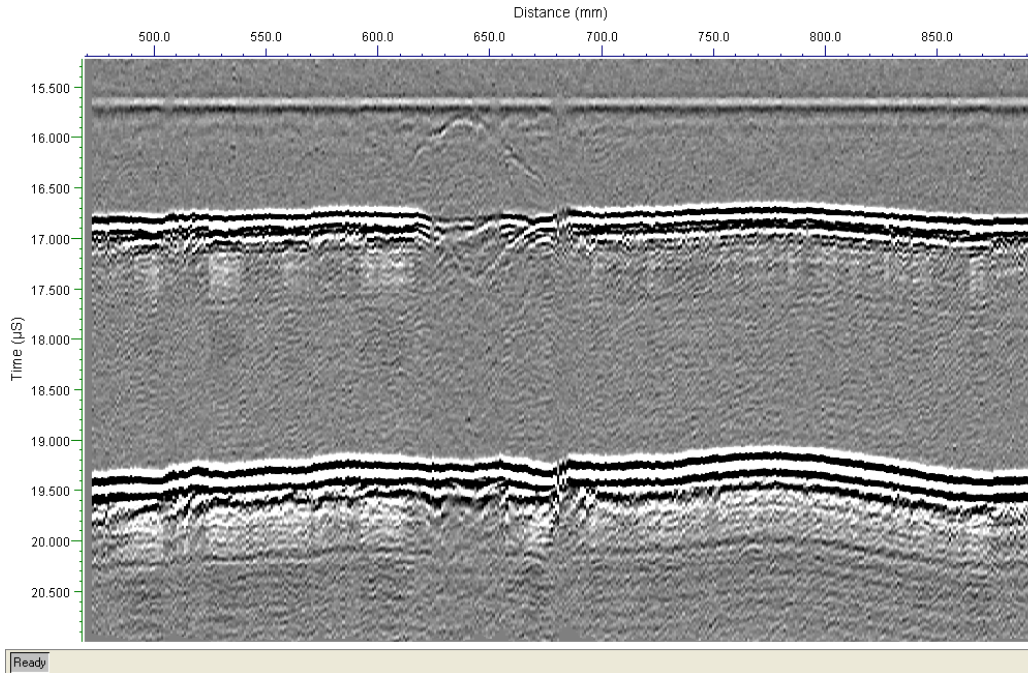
Detected crack on anode pad 16B after the 3 point bending operation (upper image). The crack was forced open and revealed an oxidized fracture surface. The length and depth of the crack was measured to be respectively 76 mm and 8.1 mm.
